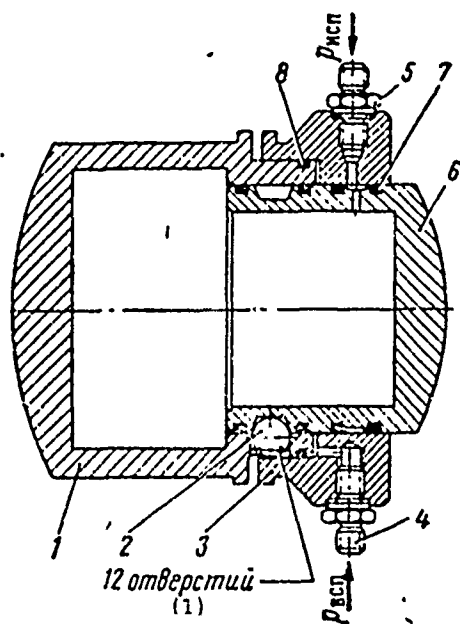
Simulator of an assembly for checking the strength of an armor-clad unit: 1 - housing; 2 - ball; 3 - ring; 4, 5 - fittings; 6 - cover; 7, 8 - seal rings.
